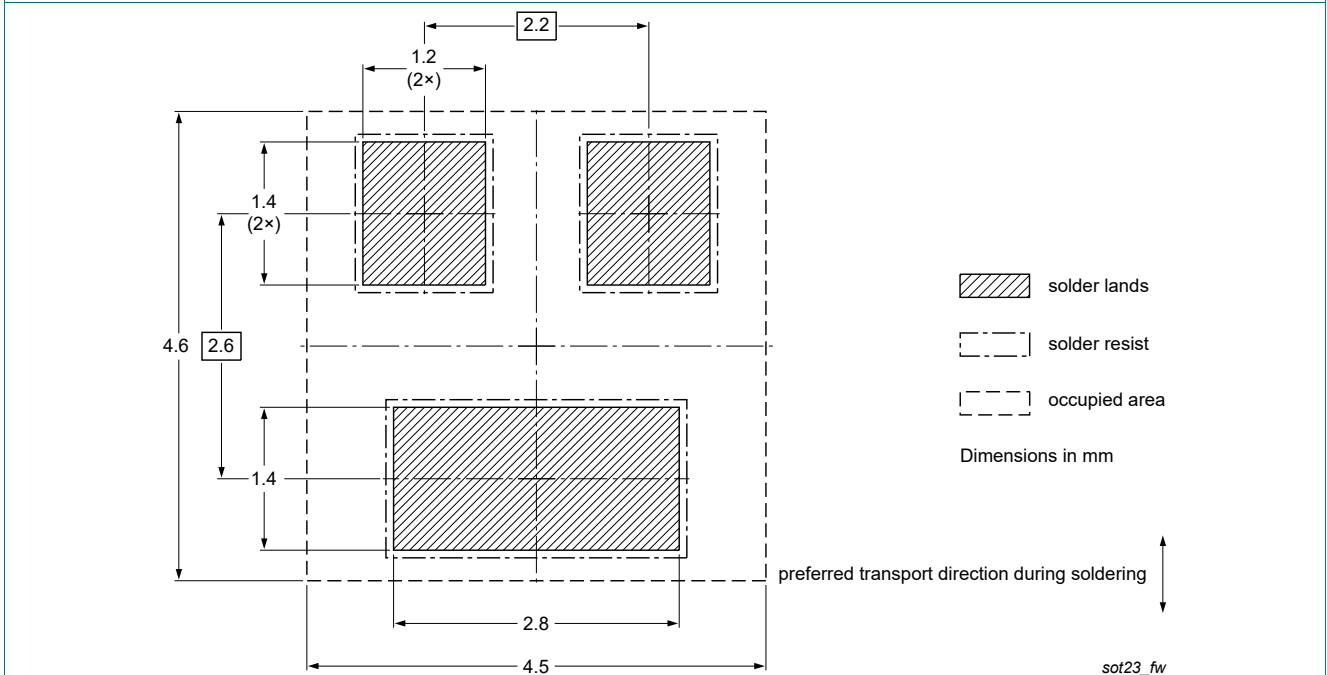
Wave soldering footprint TO-236AB (SOT23)
